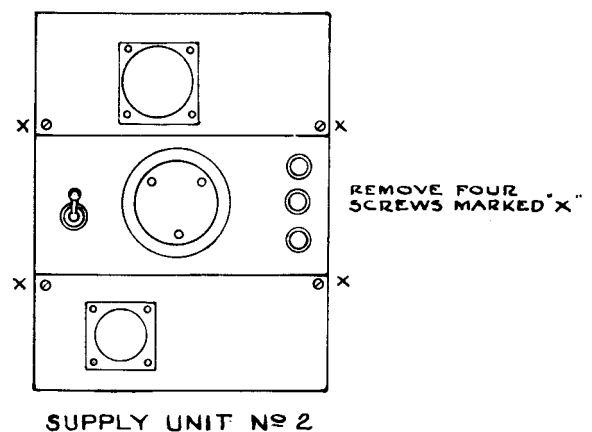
LOOSENING SUPPLY UNIT FRONT
